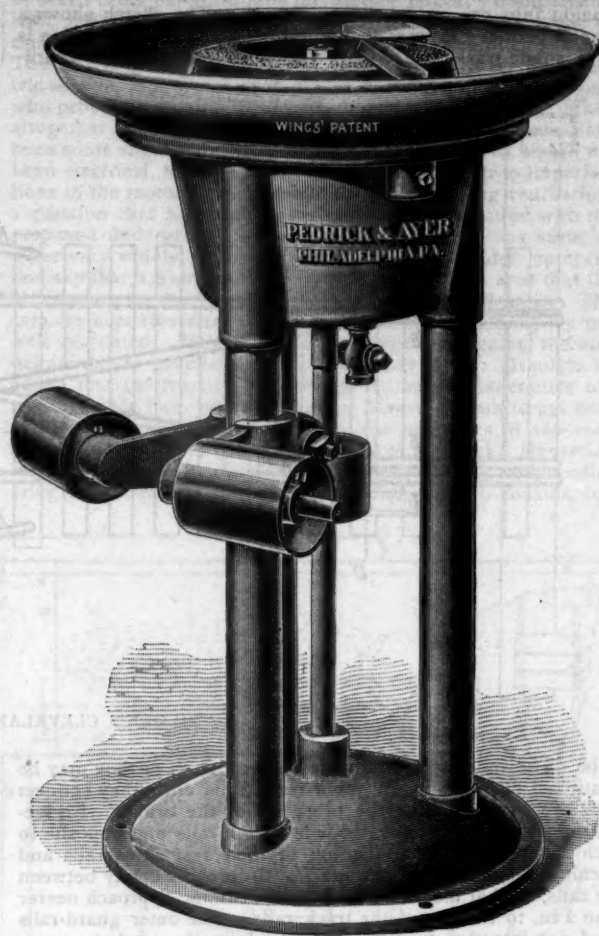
NO. 12 UPRIGHT GRINDER.
